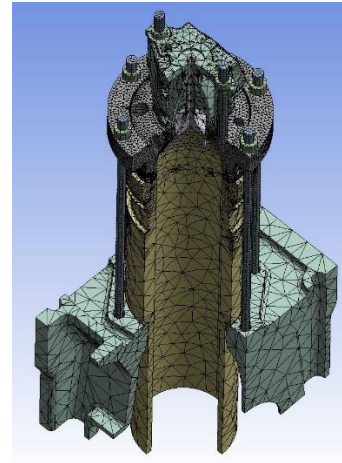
Finite Element (FE) model of the combustion chamber components, i.e. hot parts
